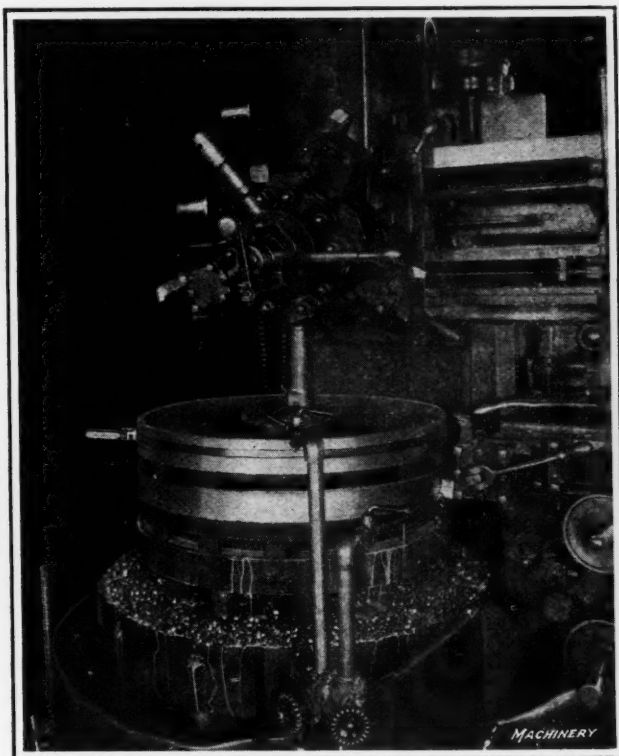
Vertical Turret Lathe equipped for performing First Sequence of Operations on Packard Five-ton Truck Wheels
